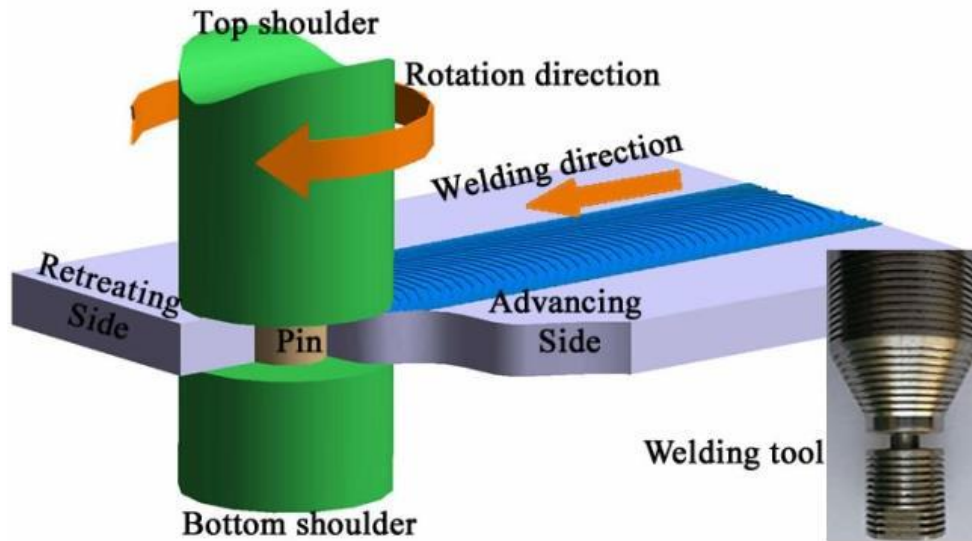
Schematic illustration of bobbin tool friction stir welding process [34]
